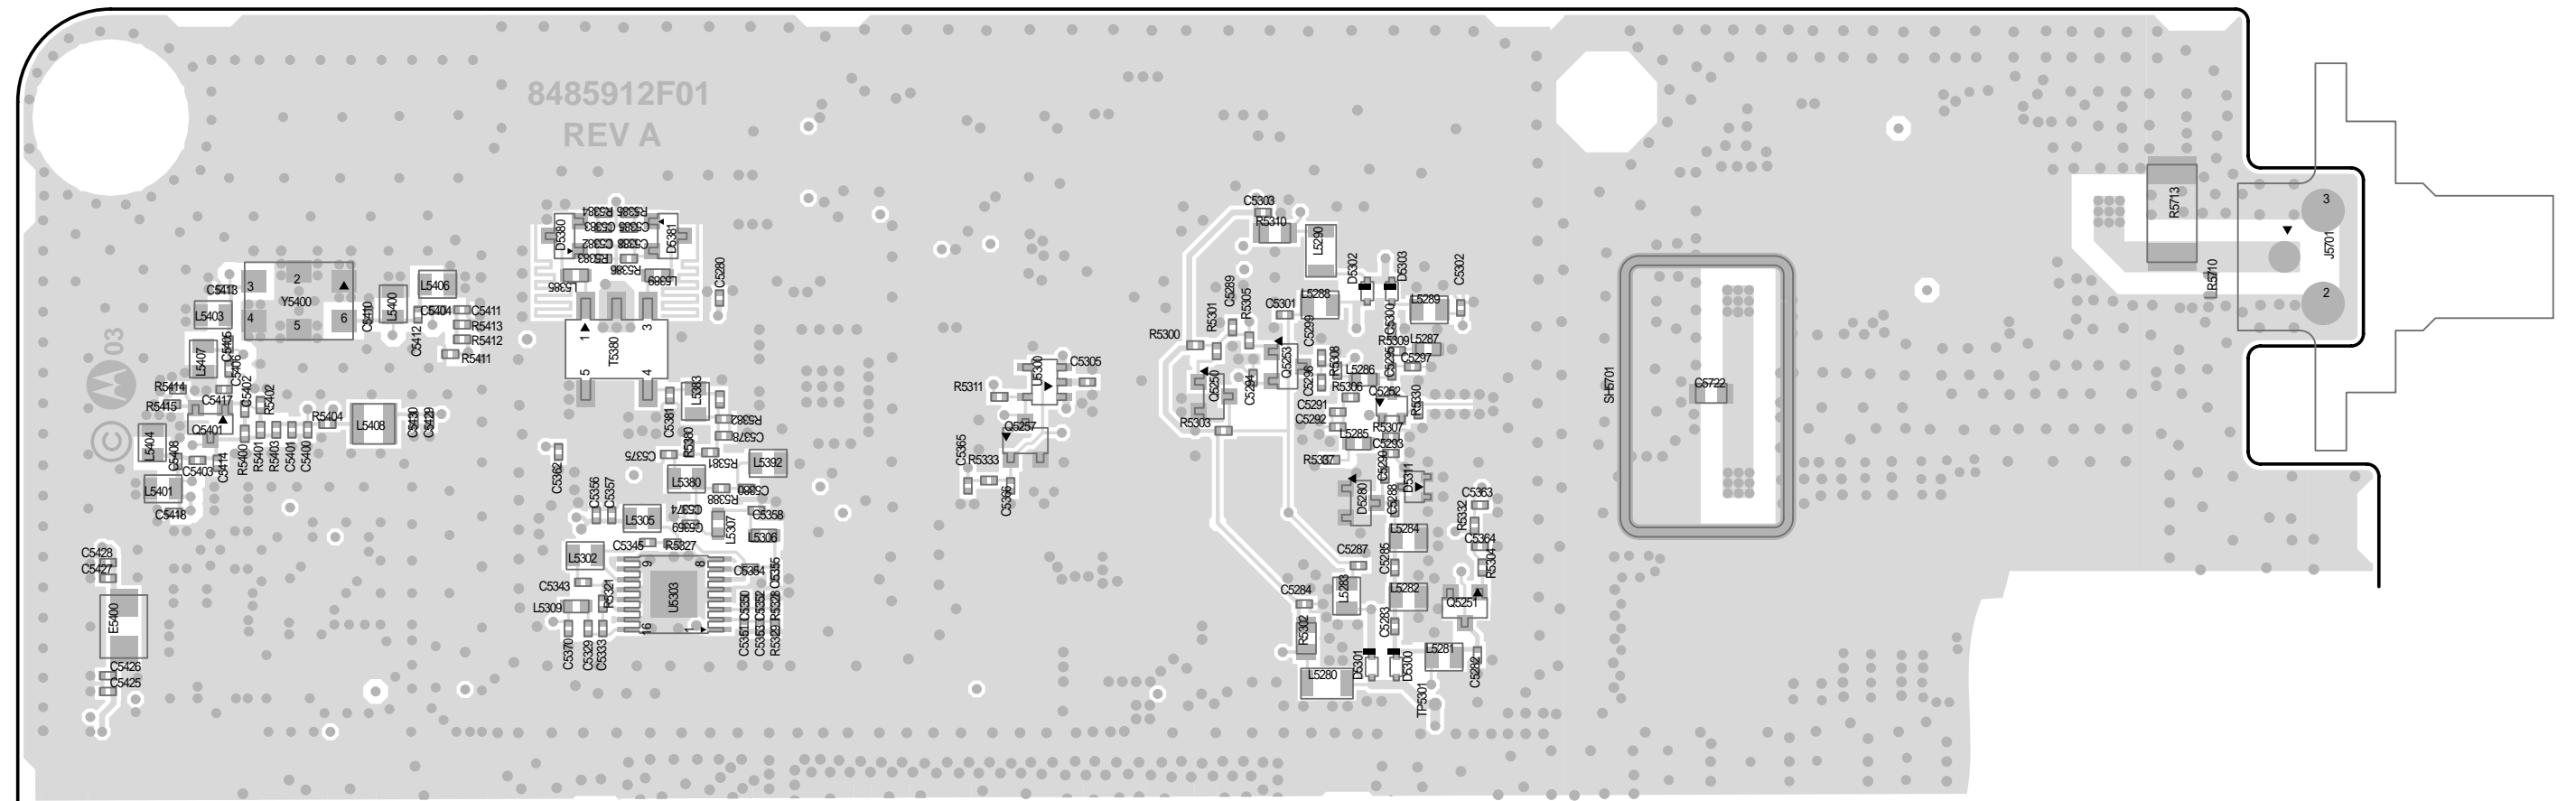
HUE4040A Main Board Layout—Side 1 Top
